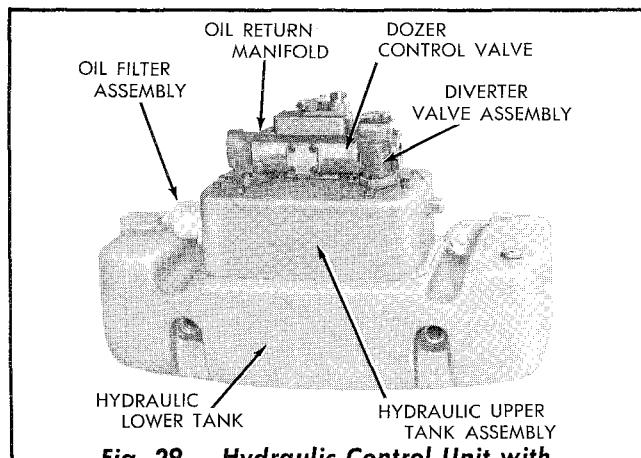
Hydraulic Control Unit with Diverter Valve Installed
